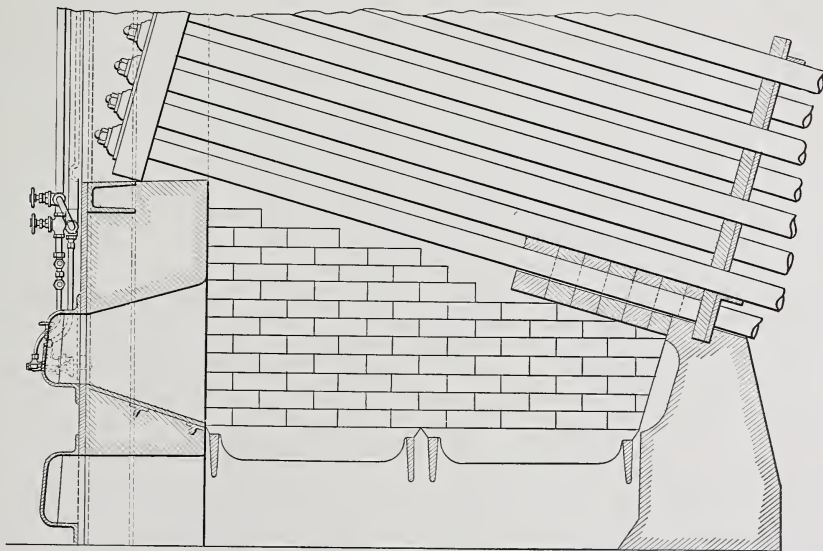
A SECTIONAL VIEW OF FIG. 5
